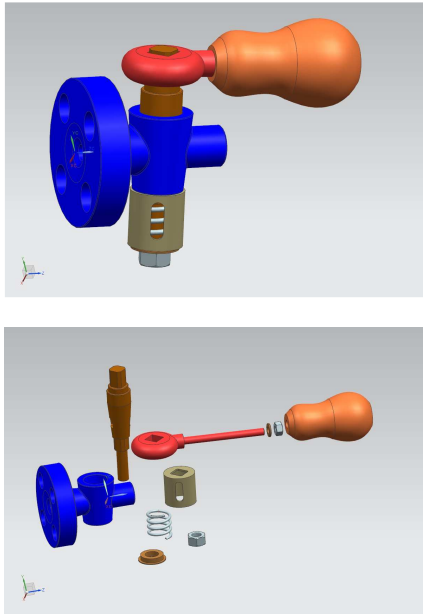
Unexplode and explode viewings of 3D assembly TPV
